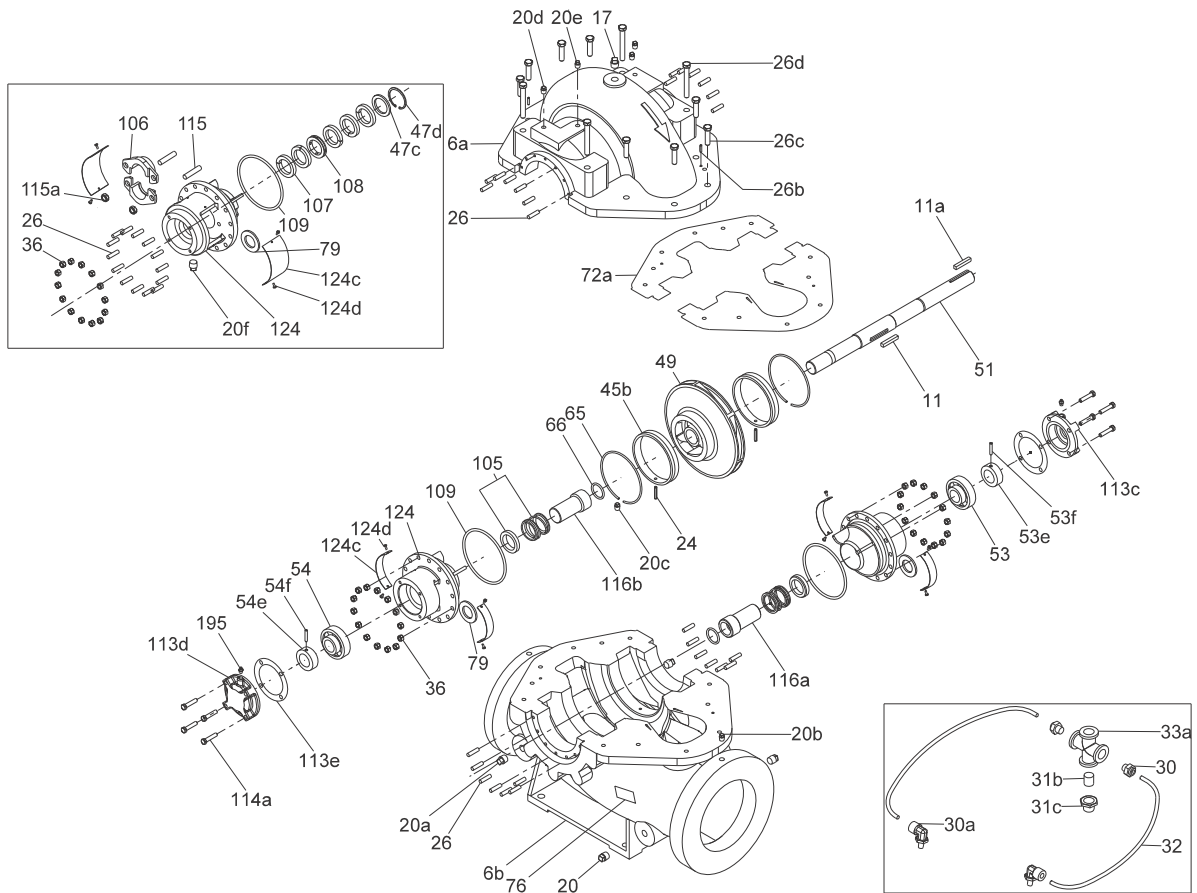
Construction type 2: LS 125-100-279, LS 125-100-381, LS 125-100-305, LS 100-80-356, LS 200-150-305A
